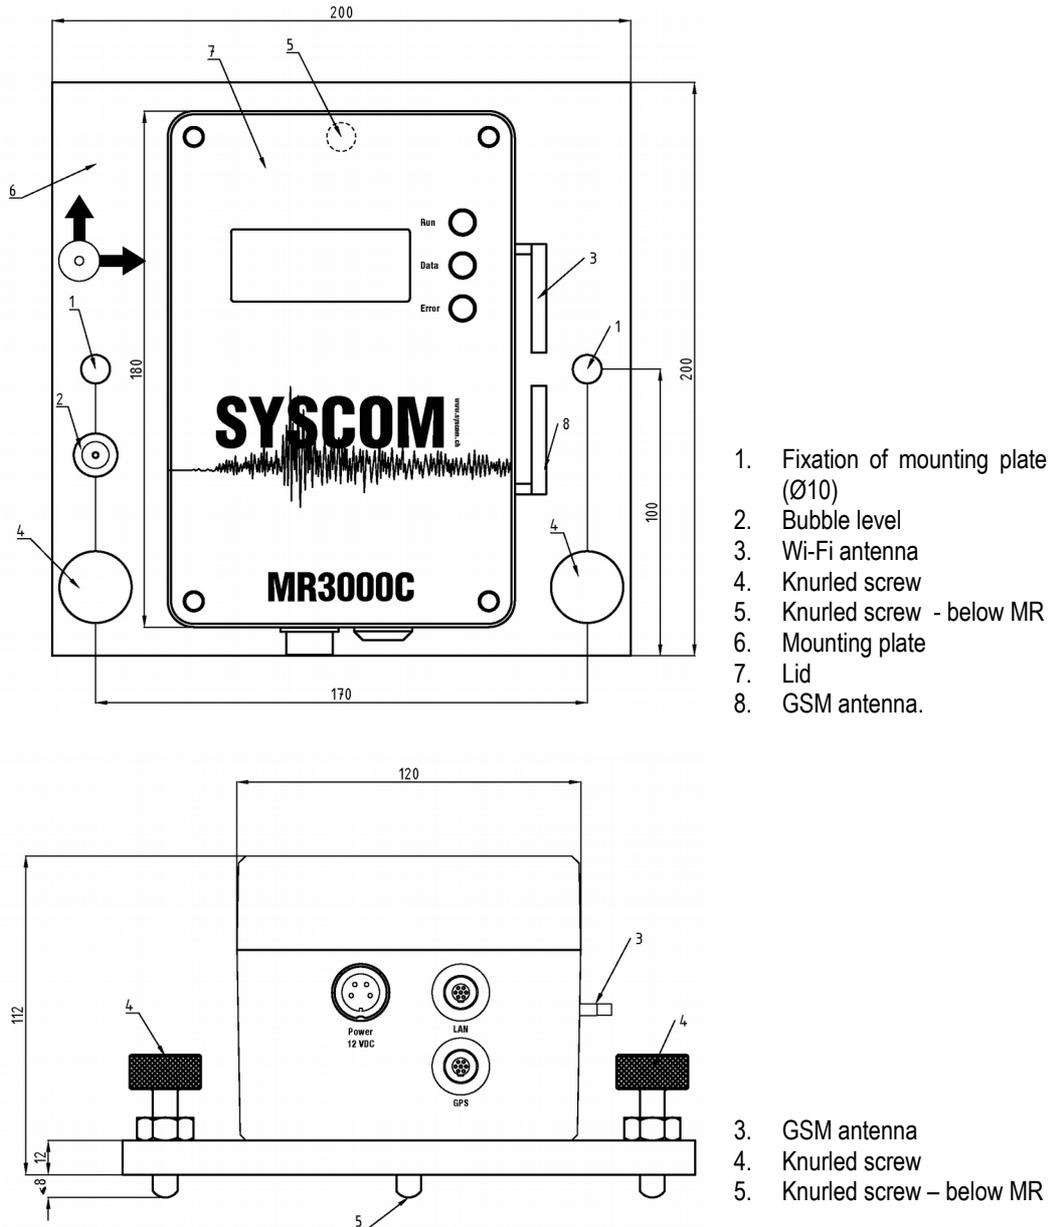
Mechanical drawing of the MR3000C – Top view and side view.
